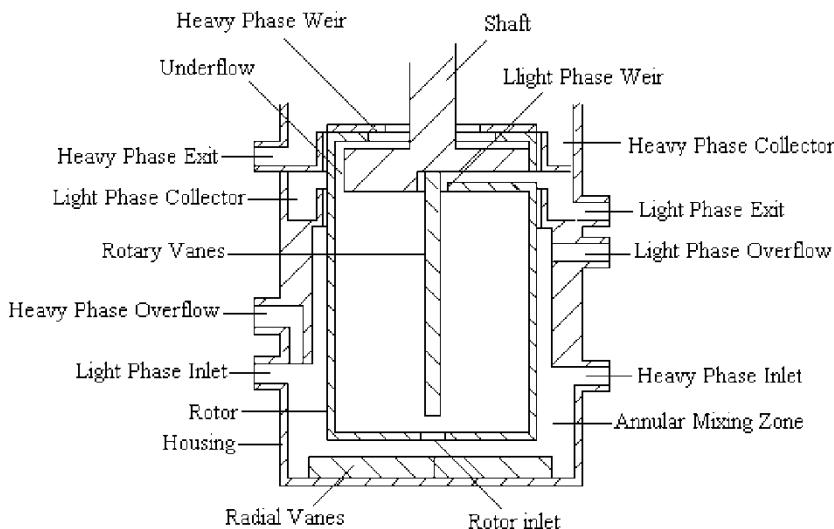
Cutaway view of the 70-mm annular centrifugal contactor.
